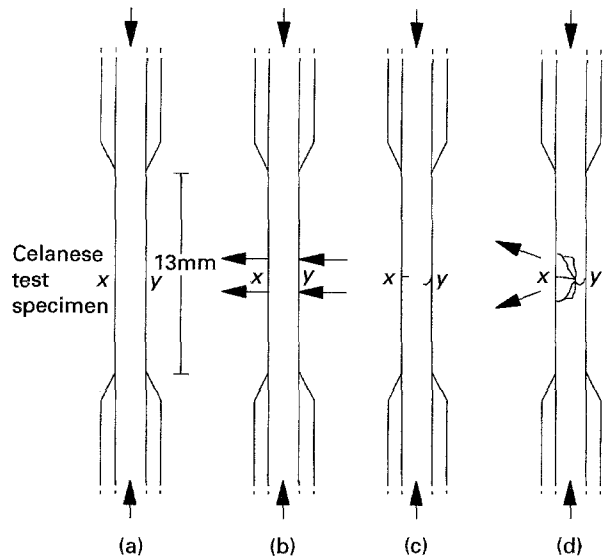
Macroscopic transverse compressive fracture mechanism for celanese specimens of gauge length 12.7 mm (a) Specimen under initial compressive load; (b) Buckling of the specimen in the centre section; (c) Tensile cracking on the tensile face of the specimen; (d) Premature fracture by buckling and fragmentation of the test section.
